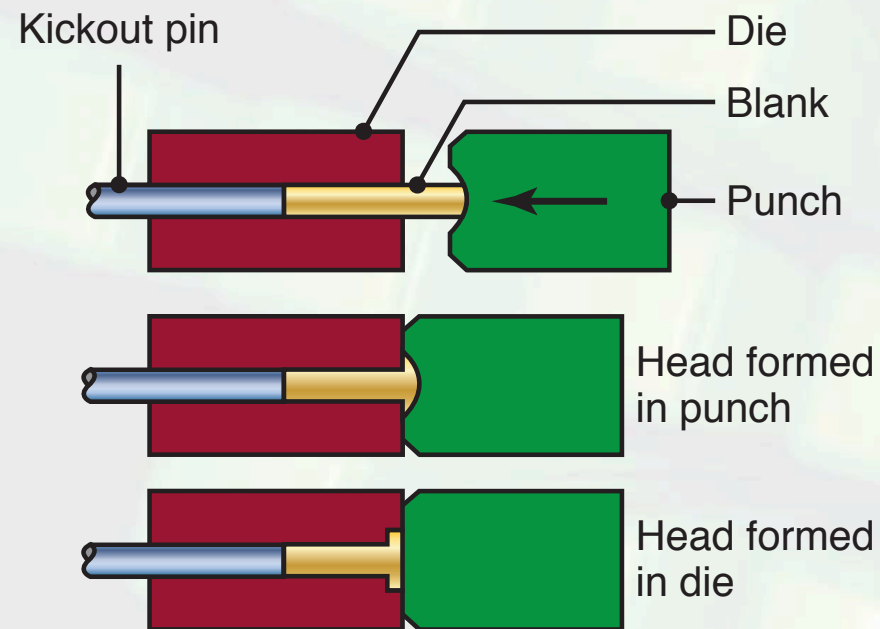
Forming the heads of fasteners, such as bolts and rivets, by the *heading* process.
